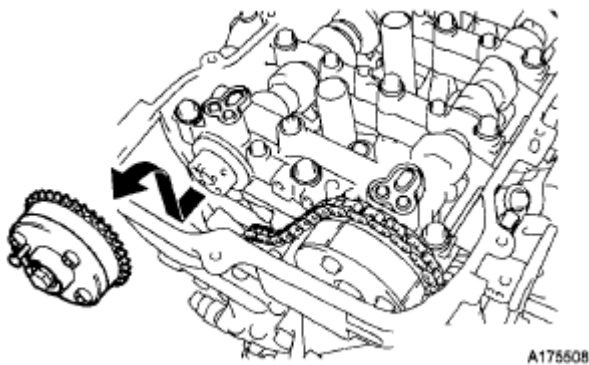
Removing Camshaft Timing Exhaust Gear Assembly
